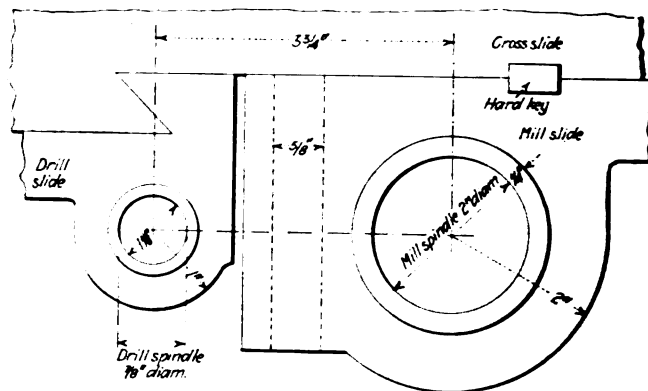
SCALE DRAWING OF PARTS OF MILLING AND DRILLING HEAD
